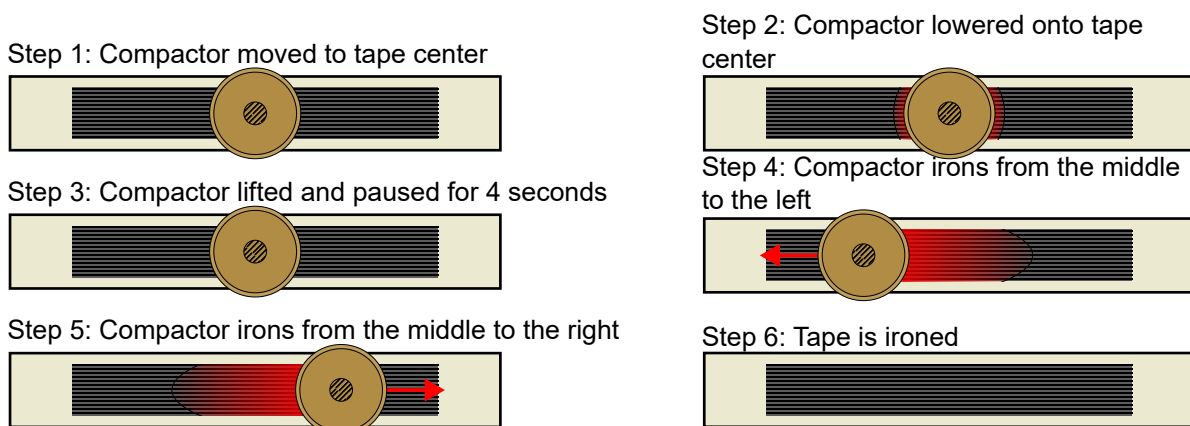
Tape compaction sequence used to weld tapes to the substrate below. Compactor tool shown from above, with red trails when heat is being transferred to the tape.
